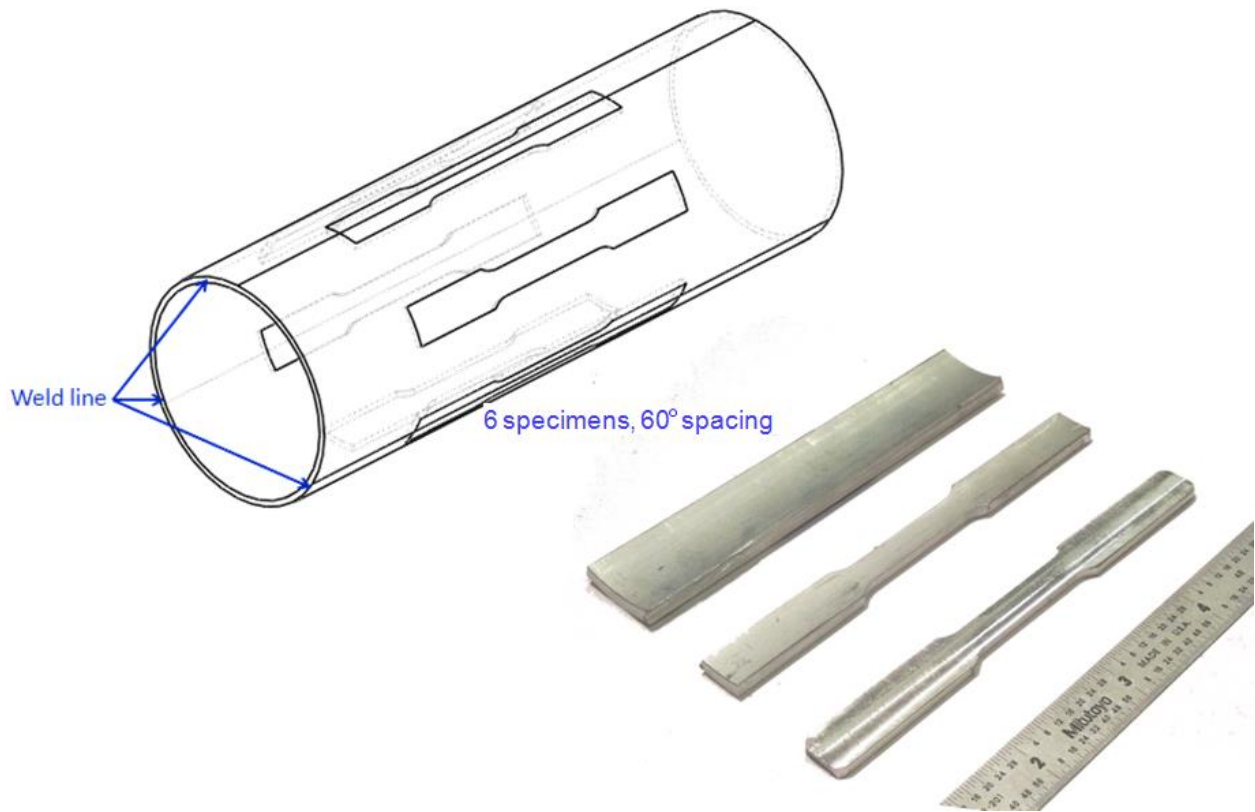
Extraction of axial ASTM E8 subsized specimens from tube. Tensile specimen dimensions reprinted from ASTM E8 publication [26].
